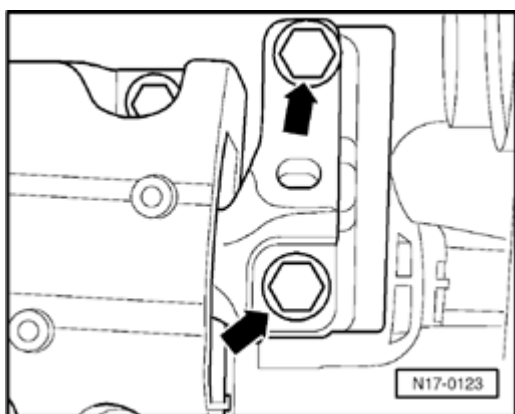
Identifying Engine Side Of Assembly Mounting At Engine Bracket At Top
